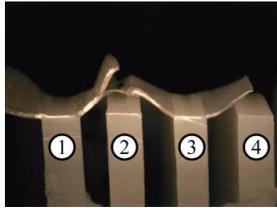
Sectioned view of workpiece, showing material flow at low depths of cut due to rubbing. Tests performed with a cooled workpiece, 0° rake angle, worn tool. Each disc is of width 2.2 mm, with the remaining material on 1 being approximately 0.45mm thickness, and on 3 being approximately 0.25 mm thickness
